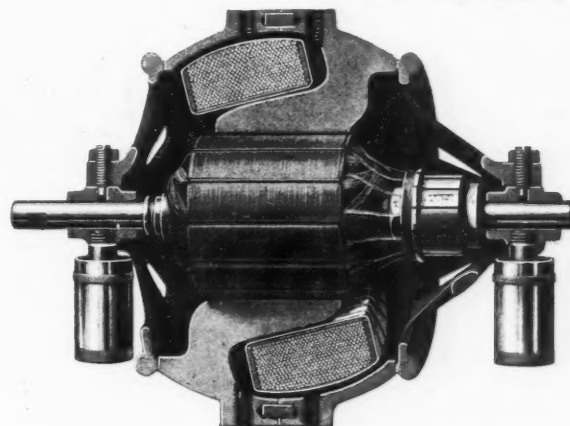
SECTIONAL VIEW THROUGH LUNDELL FAN MOTOR.
